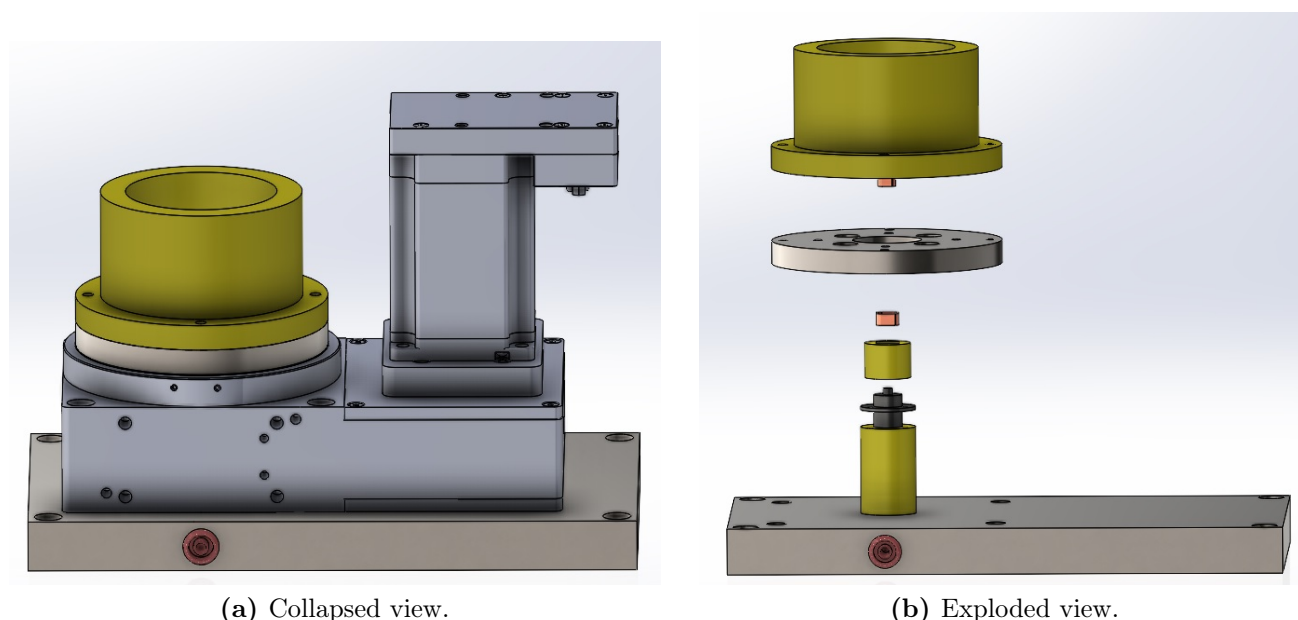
Motor assembly with slip ring feature, rotational tribometer.
